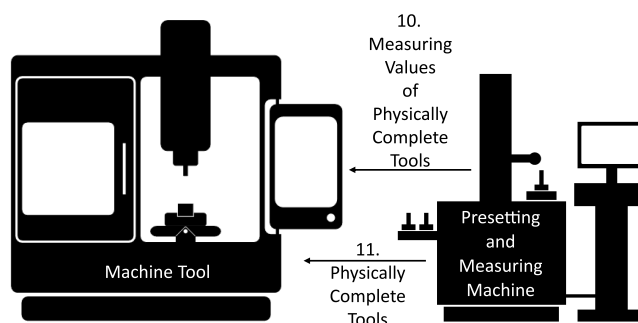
Data transfer from presetting and measuring machine to machine tool
